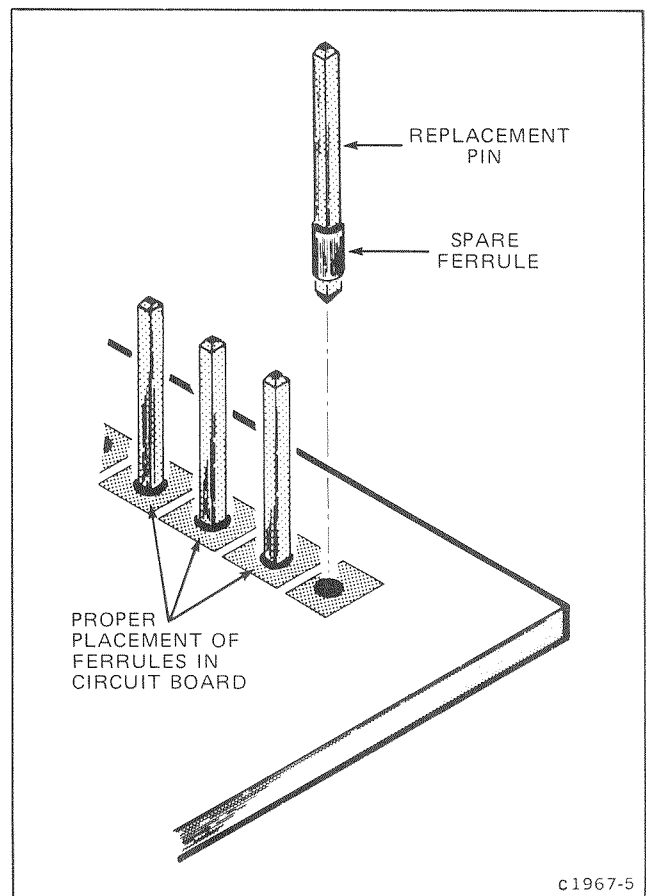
Exploded view of circuit-board pin and ferrule.
